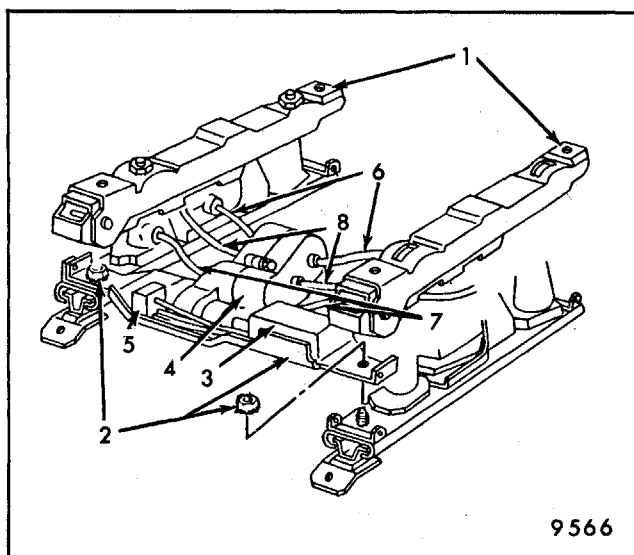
Power Operated Six-Way Seat Adjusters - All 45-55, 50-50 and 60-40 Seats
